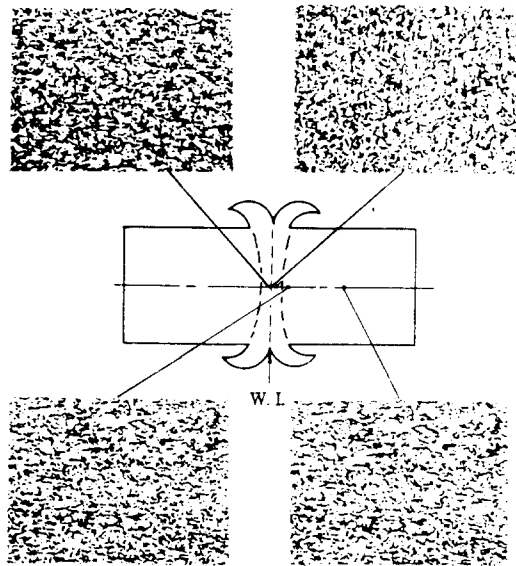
Micro structure of friction welded joints of SUP9A bar to bar
